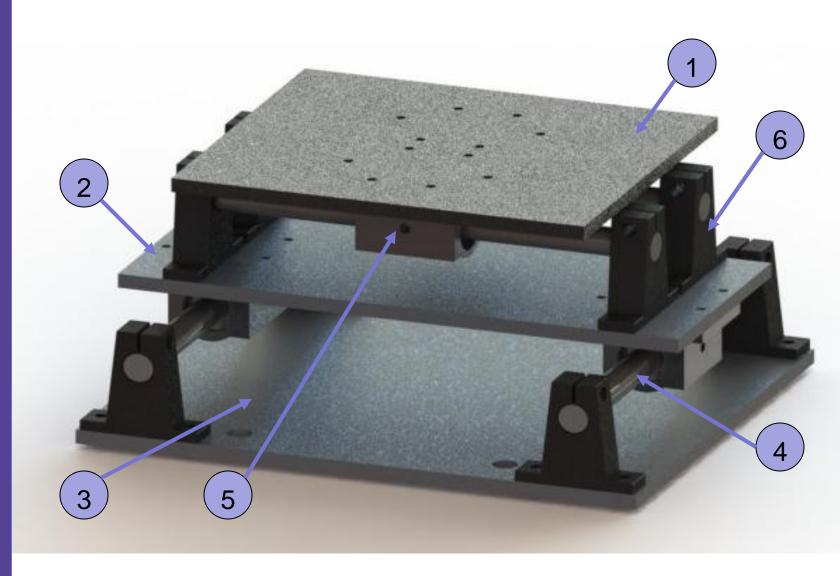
Rendered model of the linear bearing system with a bill of materials.
